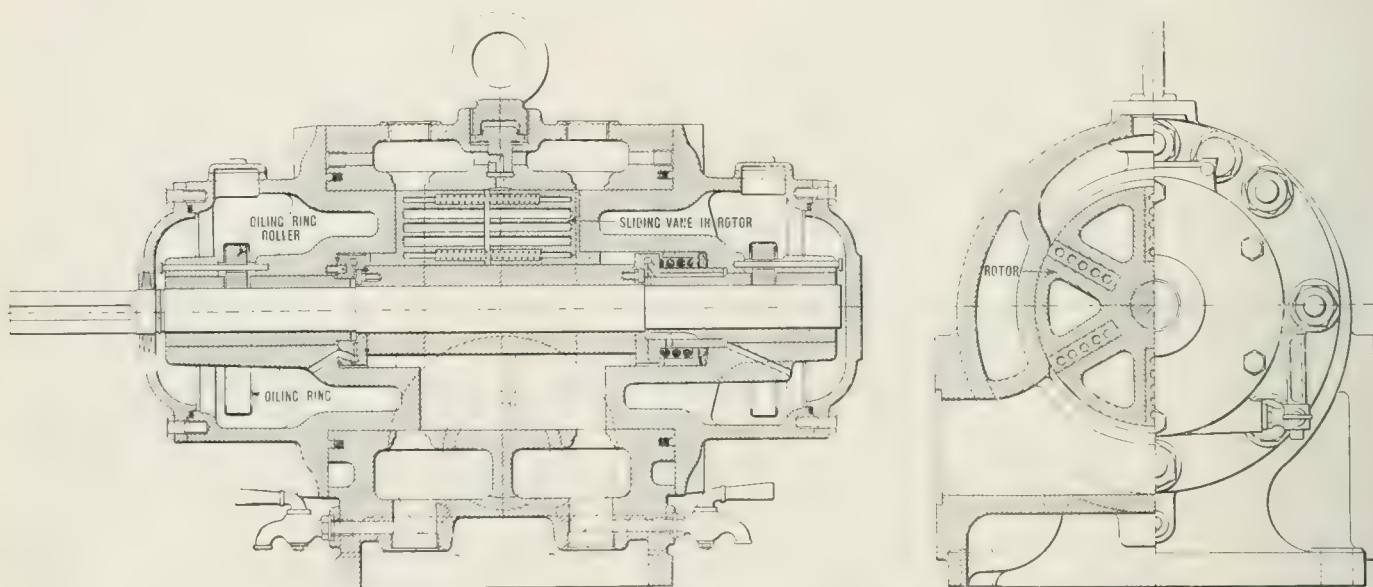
End and Side Sections of Pittler Rotary Pump.
